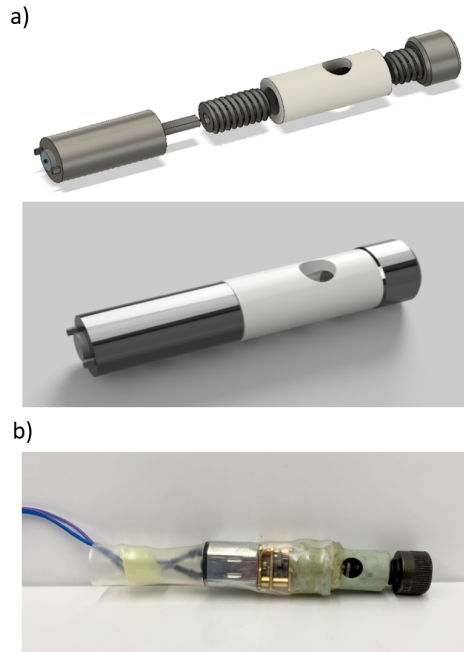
a) The complete valve and its components, from left to right, consist of a motor-gearbox, a piston with a 5/16 inch outer thread, the housing, and a 5/16 inch thread bolt stopper. b) A photo of the functioning valve is shown with shrink tubing and epoxy securely connecting the top of the valve and the motor-gearbox.
